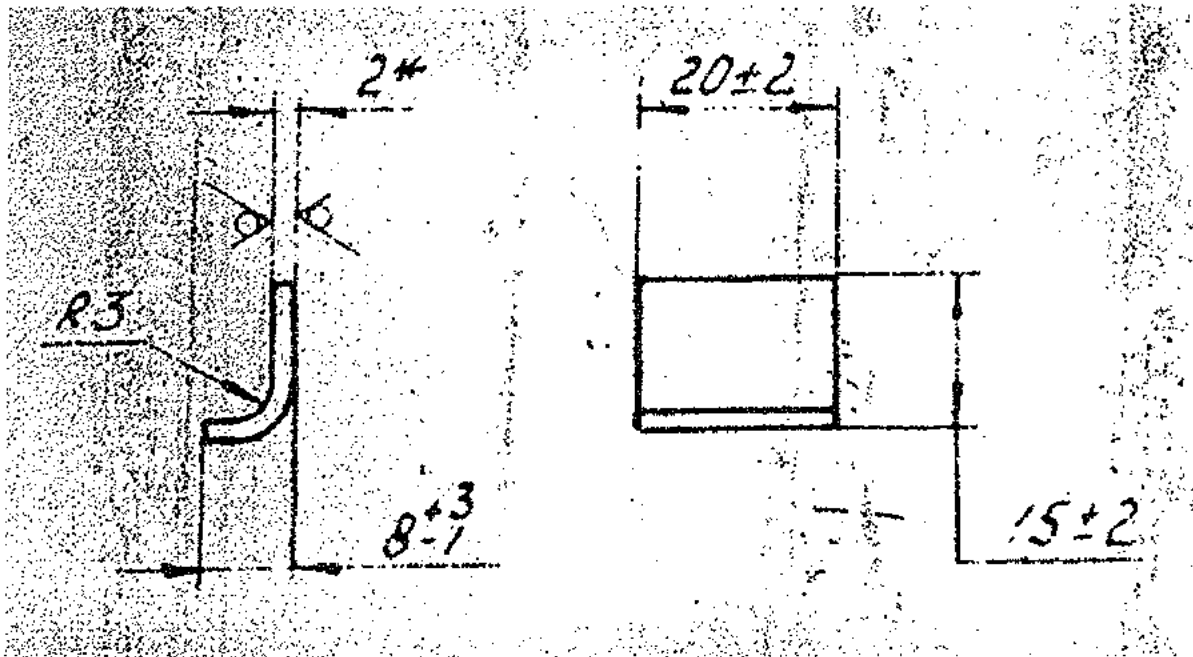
FIG: ANGLE PIECE TO DRG. NO 172.28.130- 4
